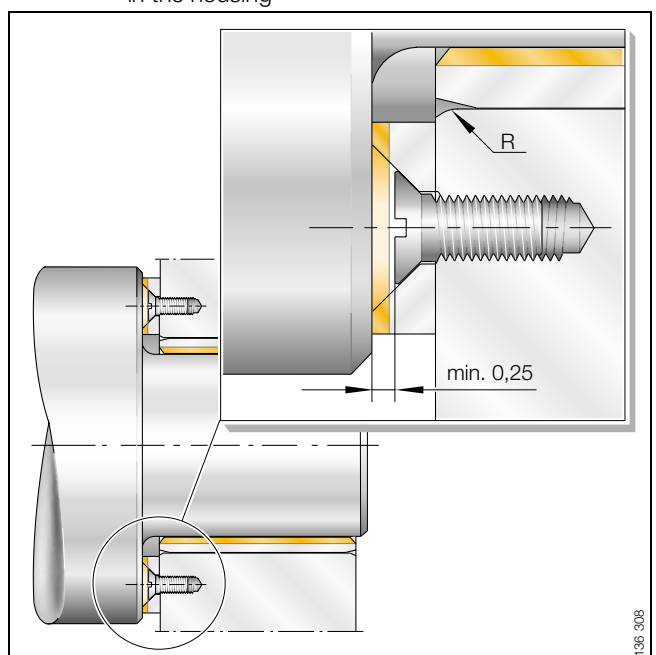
· Location of a PAW thrust washer without a recess in the housing
